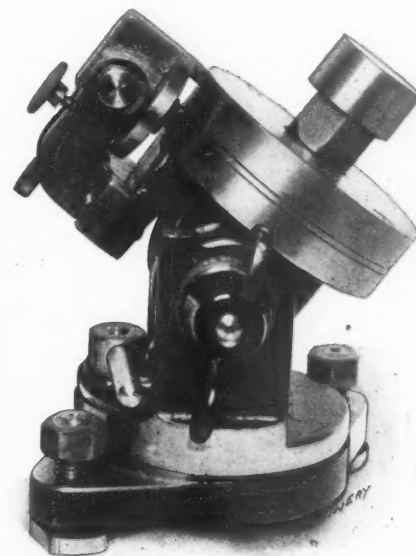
Dividing Head for Use on Schuchardt & Schutte Engraving Machine
